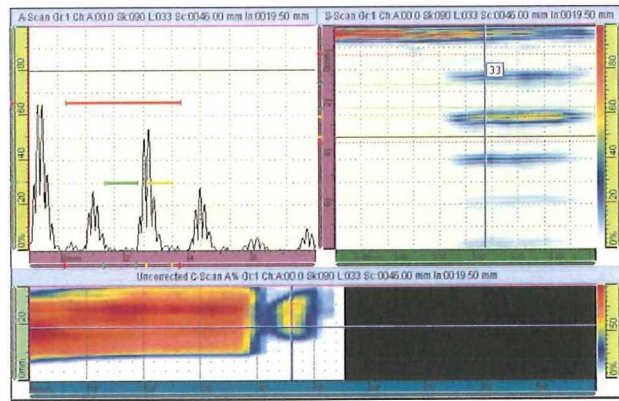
The PA scan of USW140827-05 clamped at 6 [cm] and with a torque of 2.5 [Nm]. The left section of the C-scan represents the sample, whereas the right section represents the weld. The middle of the weld has a good joint quality. However, the quality is poor near the edges of the weld.
